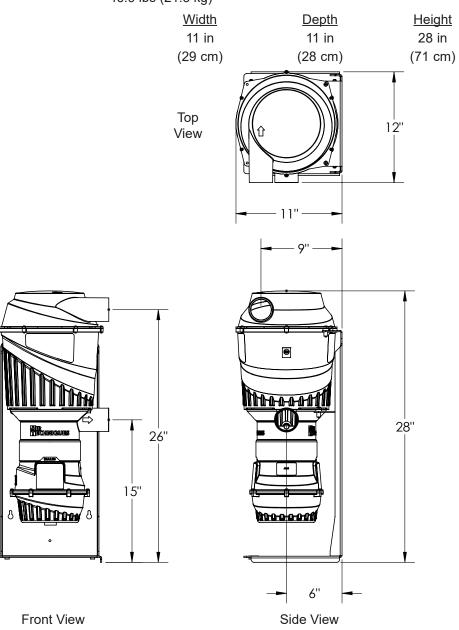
Acadia Plus Amalgam Separator Assembly Outline/Dimension Drawing
